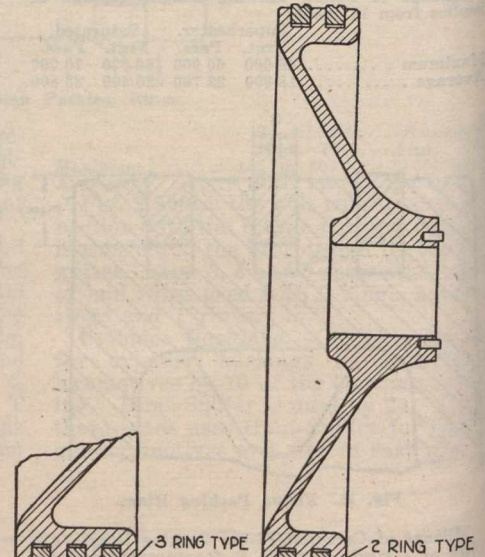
Solid Steel Plate Piston for use with extended piston rod.
